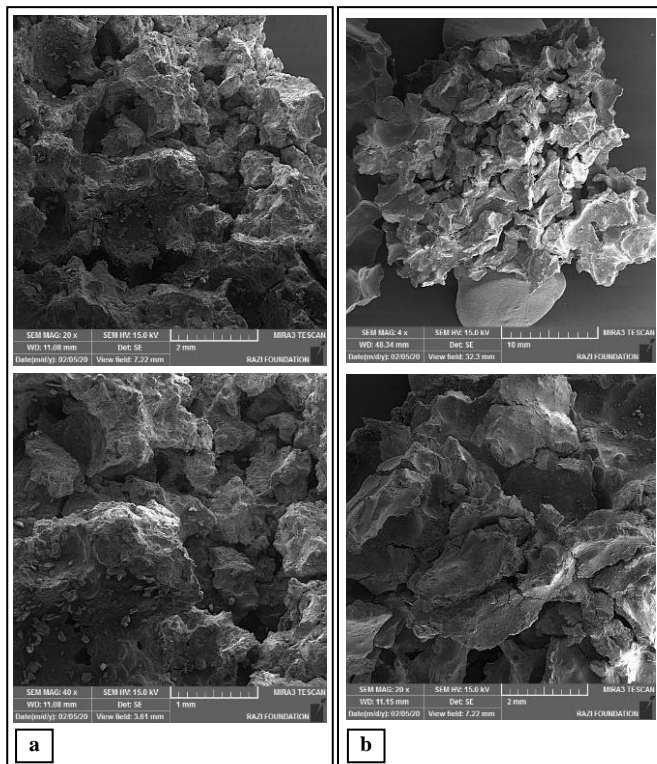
Microstructure of fracture surface (a) A356, (b) pure aluminium.
